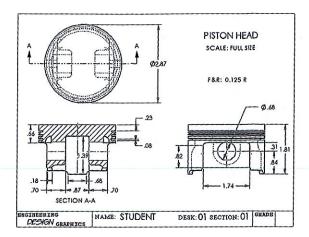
An Engineering Drawing of the Piston Head Projected Directly from the Solid Model
